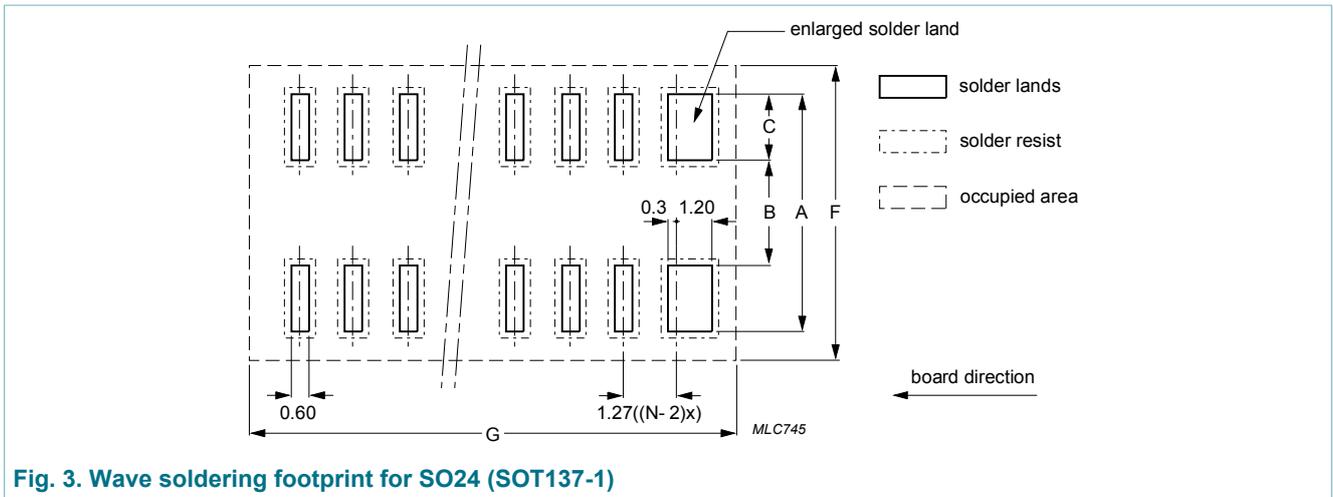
Wave soldering footprint for SO24 (SOT137-1)
